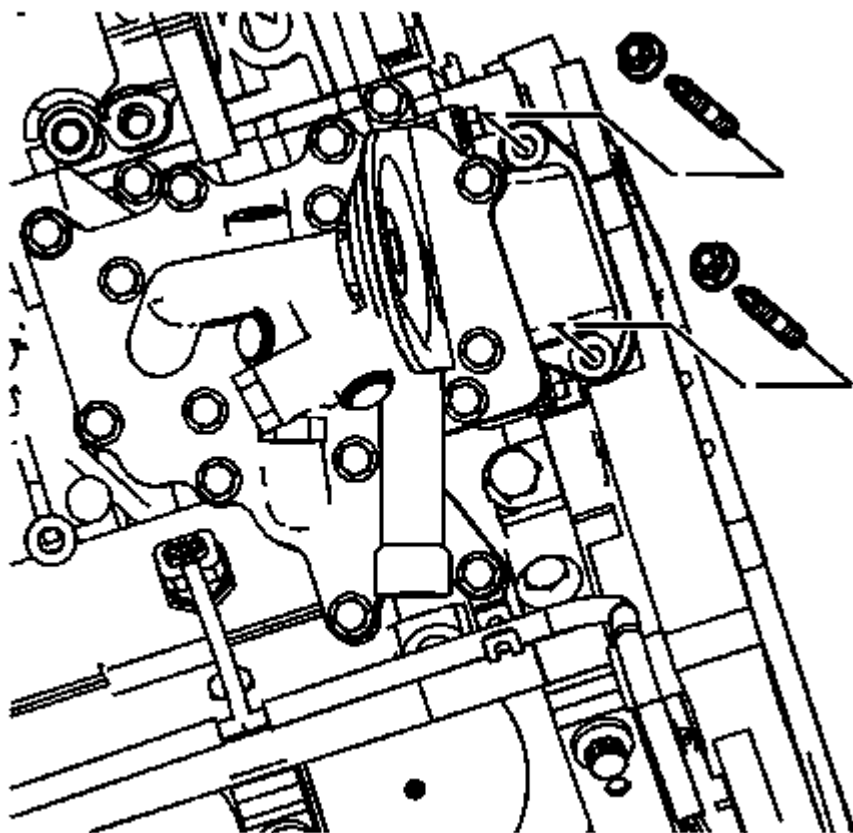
View Of Turbocharger Oil Return Pipe Nuts
